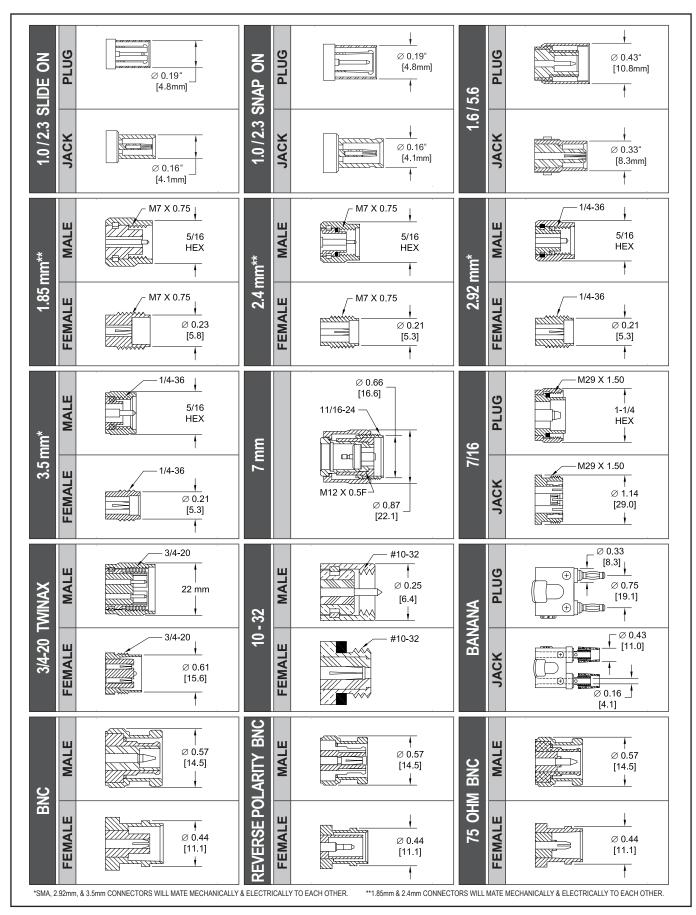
A — Connector side views, set 1 of 4. [Courtesy of Pasternak]
